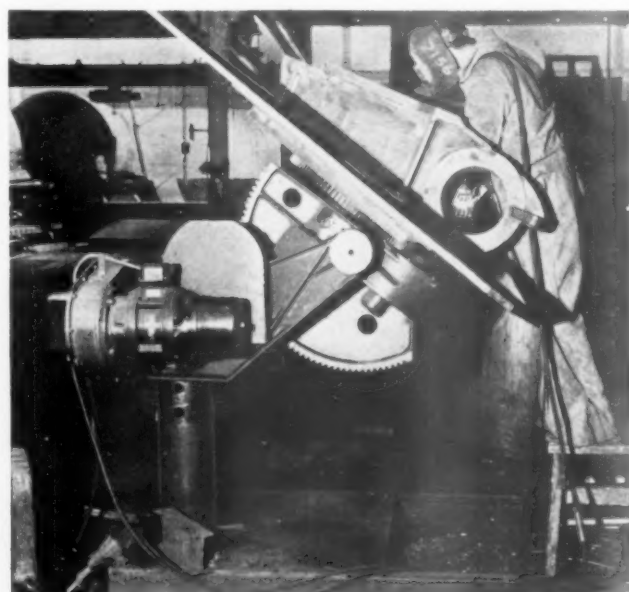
Another Cullen-Friestedt positioner used for welding a bearing assembly.
